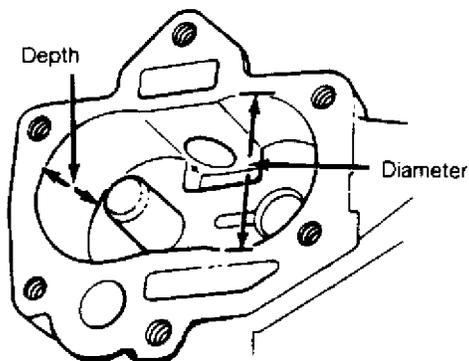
Measuring Oil Pump Gear Cavity - Typical
